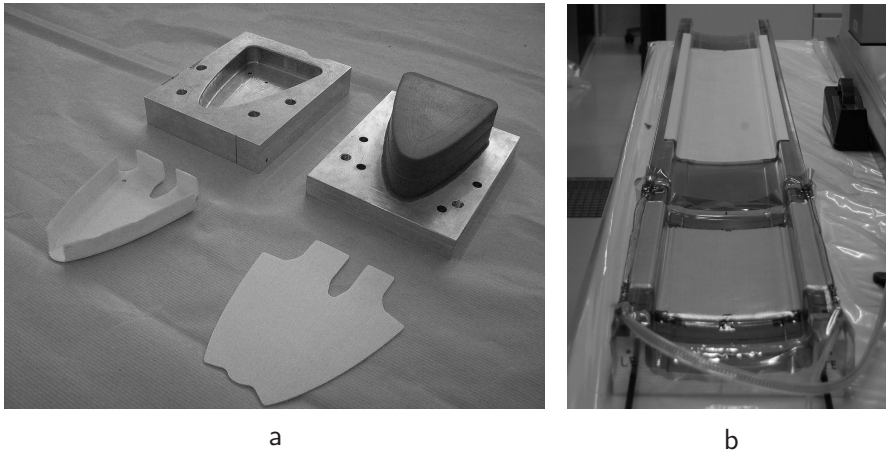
Fabrication processes. a) Rubber forming. Flat blank, moulds and finished nose rib. b) Vacuum infusion. In front: bagged preform ready for infusion. In the back: finished part.
